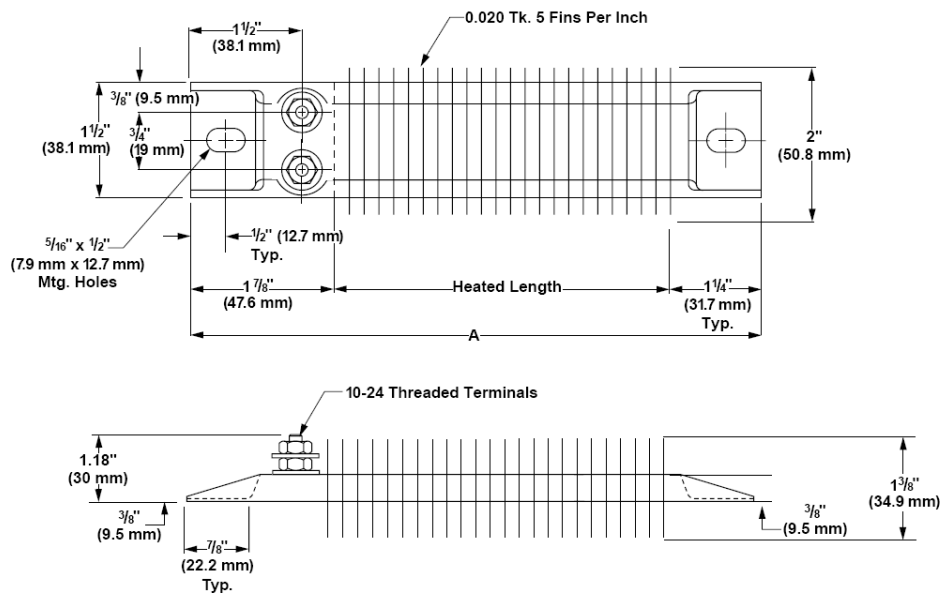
Engineering drawing of finned strip heater. A=5.5inches is used.
